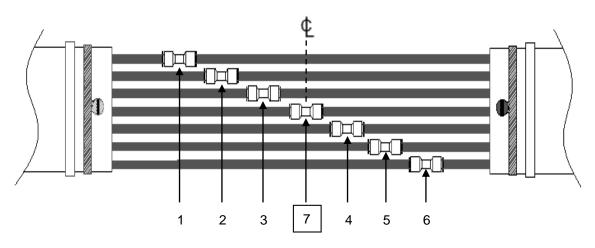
Couple Tube 7 in Center of Strip Length Dimension
